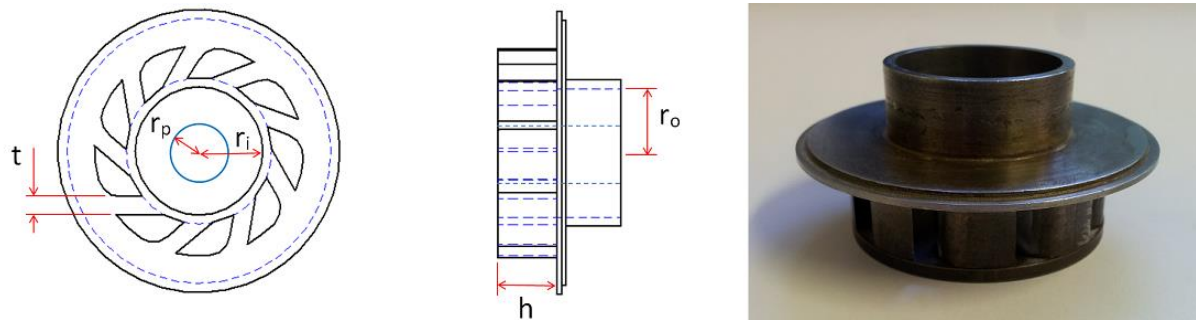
a - Swirl burner-inlet configuration, b - Swirl insert of  $S_g=1.04$
